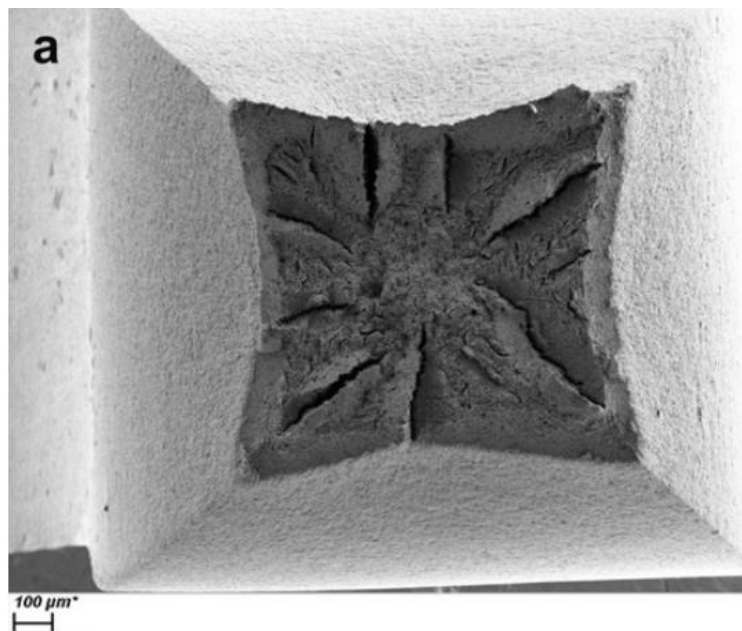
Fracture Surface of T-91 Steel <sup>77</sup>.
